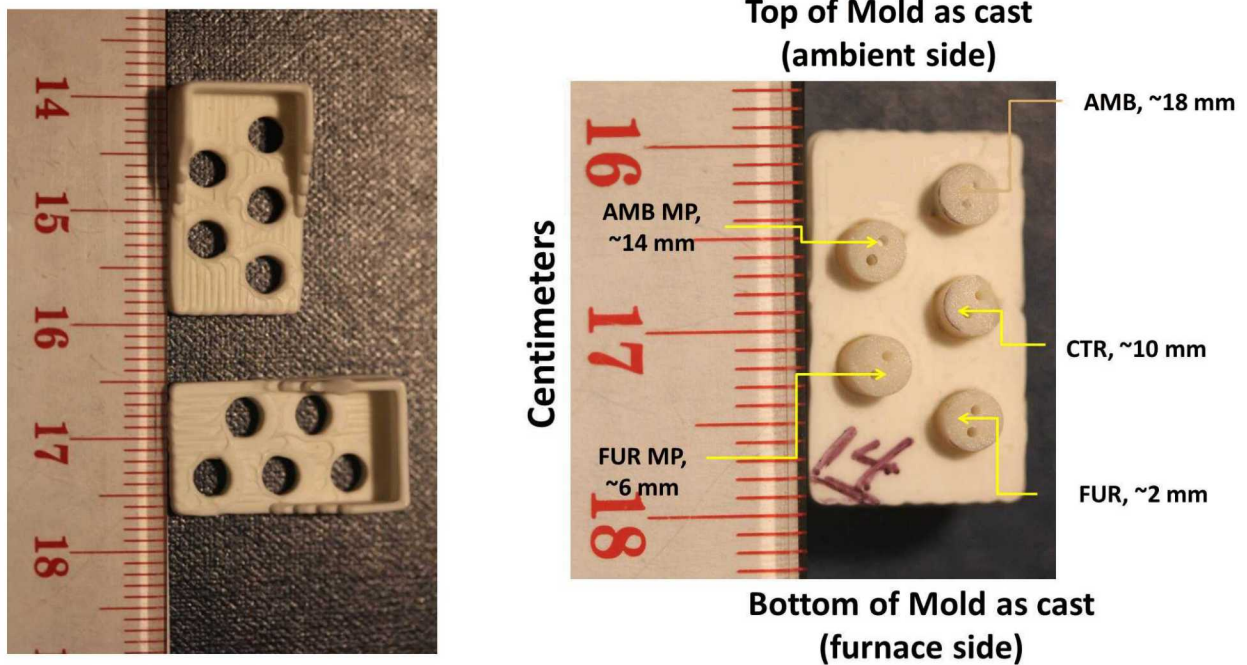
Alumina thermocouple array holder; custom design made by www.robocasting.com
